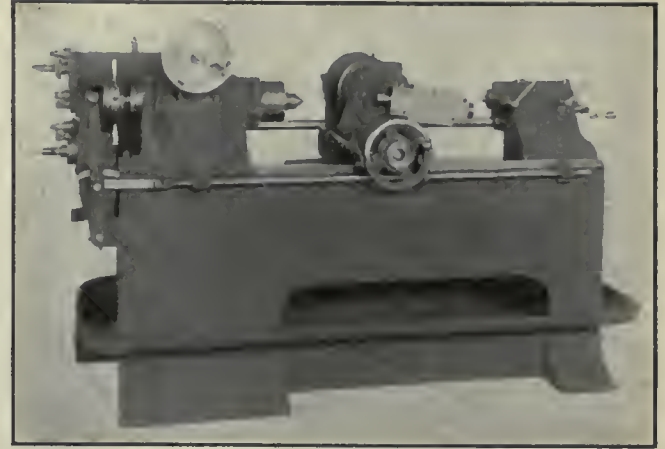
LEES-BRADNER THREAD MILLING MACHINE.
